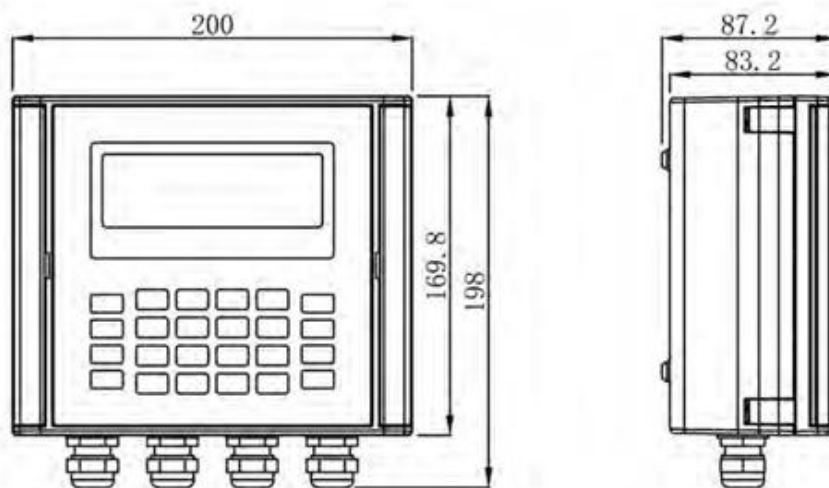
Host Overall Dimension Drawing (Unit: mm)
